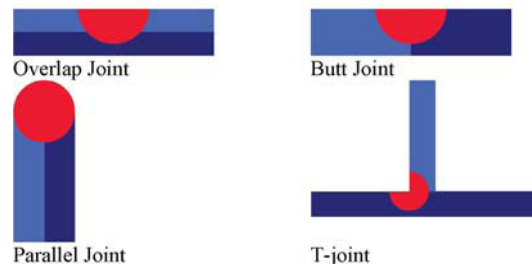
Joint geometries for micro-welding.
